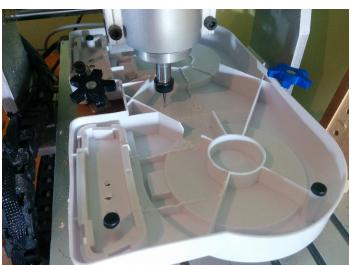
Gaining the space for the LCD with a CNC milling machine.
